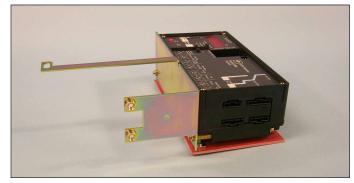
Trip Unit Installed on the Mounting Bracket.
